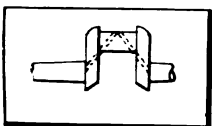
Slanting oil leads cut in crankcheek and pin, very often used in conjunction with centrifugal ring
